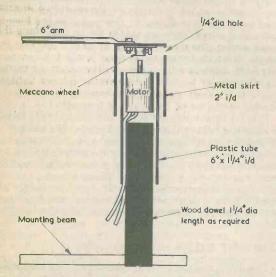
Sectional side view illustrating the motor, the motor housing and the rotor assembly
